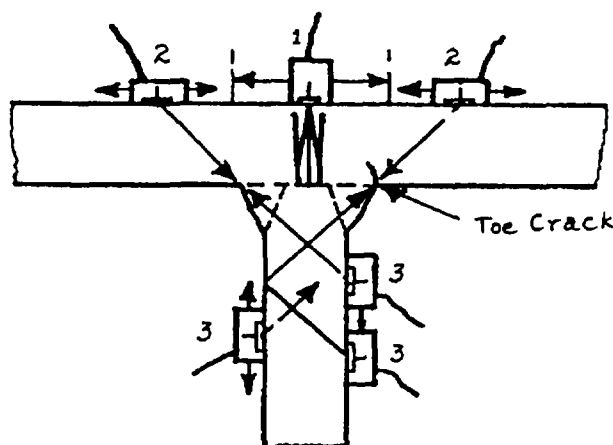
Typical scan positions for "T" welds.
